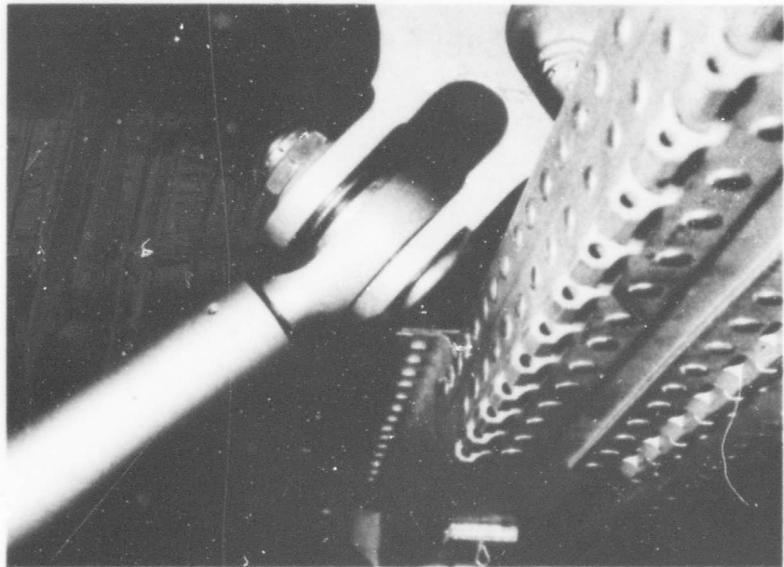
Front View of Same Rod End Showing Bearing Slippage
